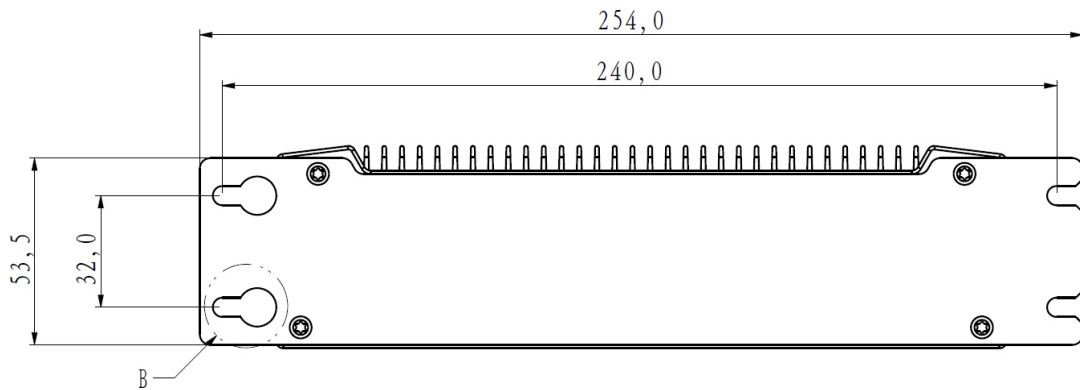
Dimensions in rear side view when using the bracket for cabinet mounting
